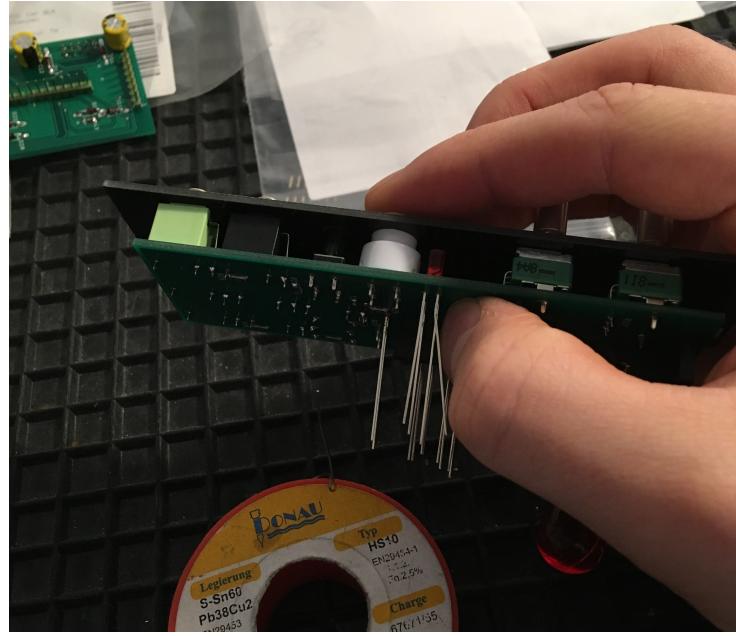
Now solder the white switches, best way to do this is to hold them in place with your finger and solder them in the same way as in figure 5
